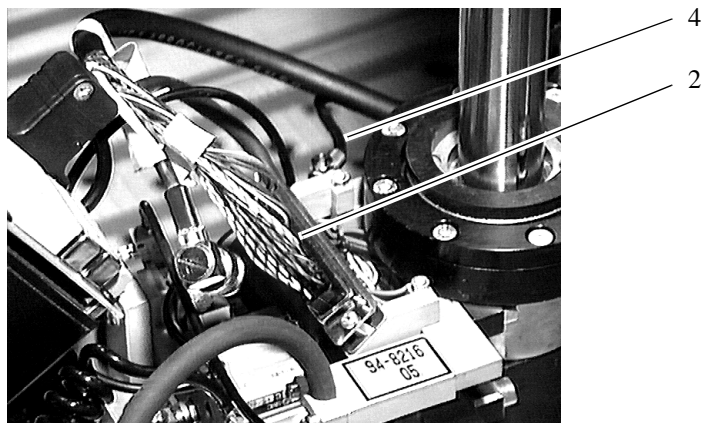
Connection Gripper Cable on the Gripper (Barcode Scanner)
